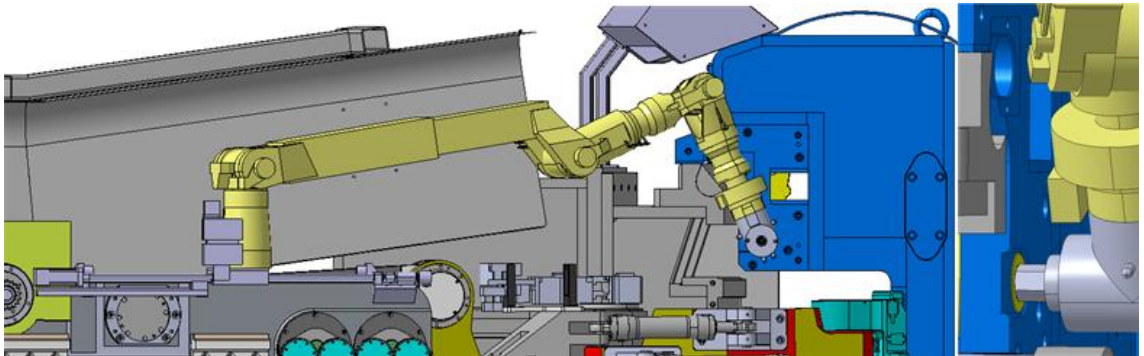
Inserting the wrench tool to wrench slot and illustrated camera view
